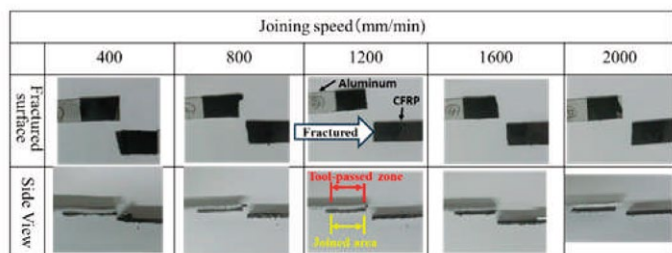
Fractured surfaces and side views of FLJ joints formed at various joining speeds after tensile shear test. (tool rotation:2000 rpm)
